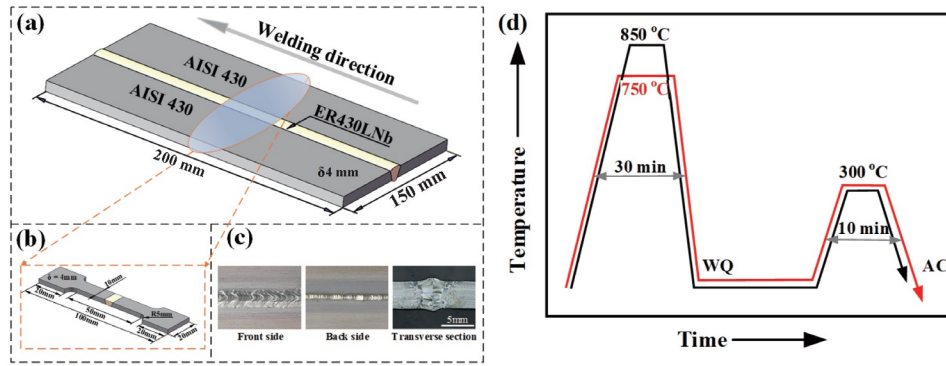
(a) Schematic diagram of welding process, (b) the dimensions of the samples for tensile tests, (c) macroscopic morphology and cross-section of the weld joint, (d) schematic diagram of PWHT process.
